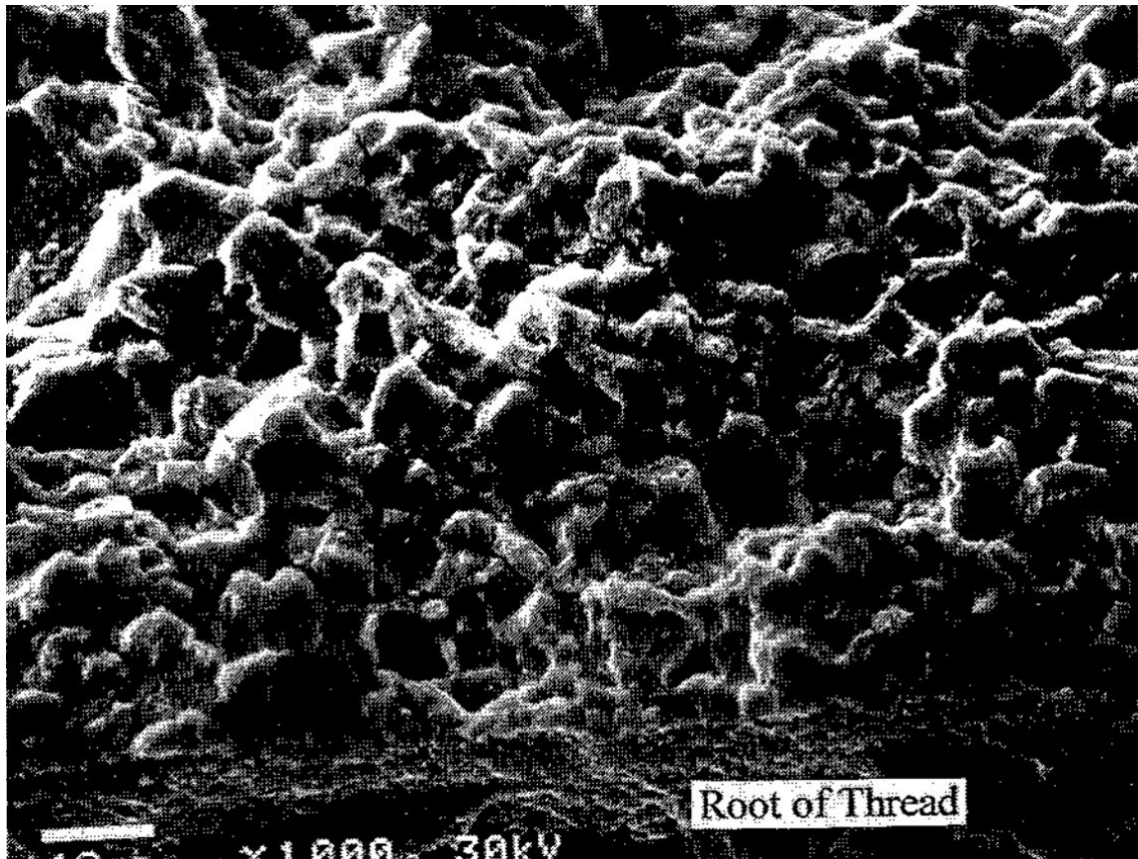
SEM image under 1000x magnification showing intergranular separation on the fractured surface of the crankshaft gear bolt, indicating hydrogen-assisted cracking [213].
